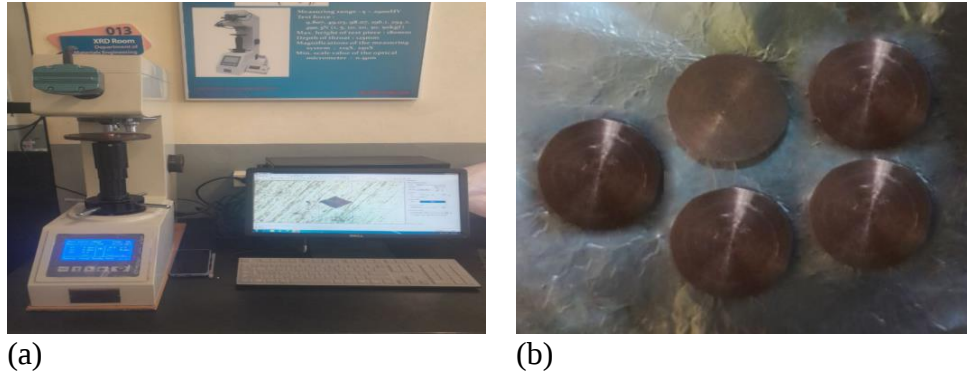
Vickers hardness testing (a) machine set up (b) specimen
